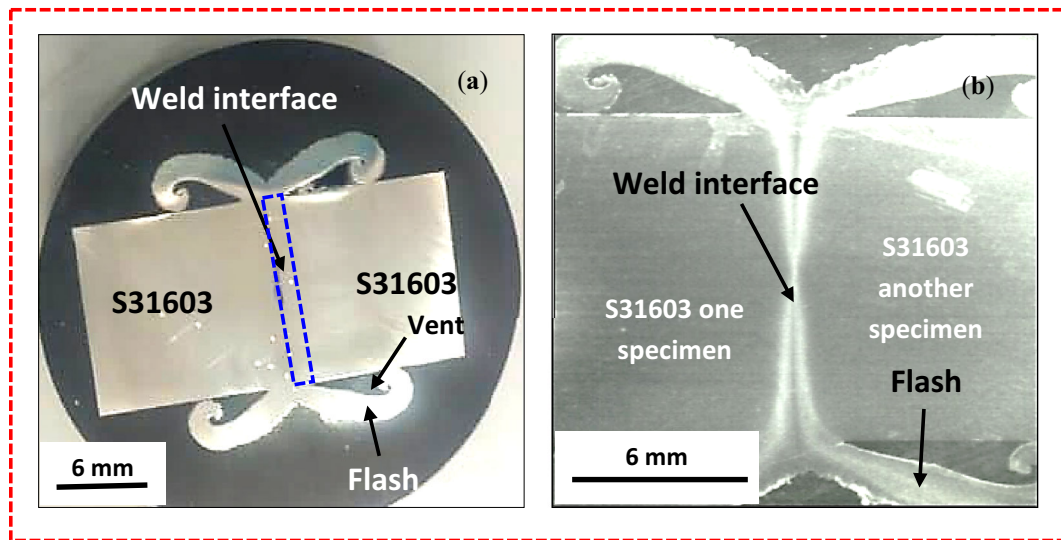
(a) weld specimen and (b) macrostructure of A4 steel (UNS S31603) similar joint.
